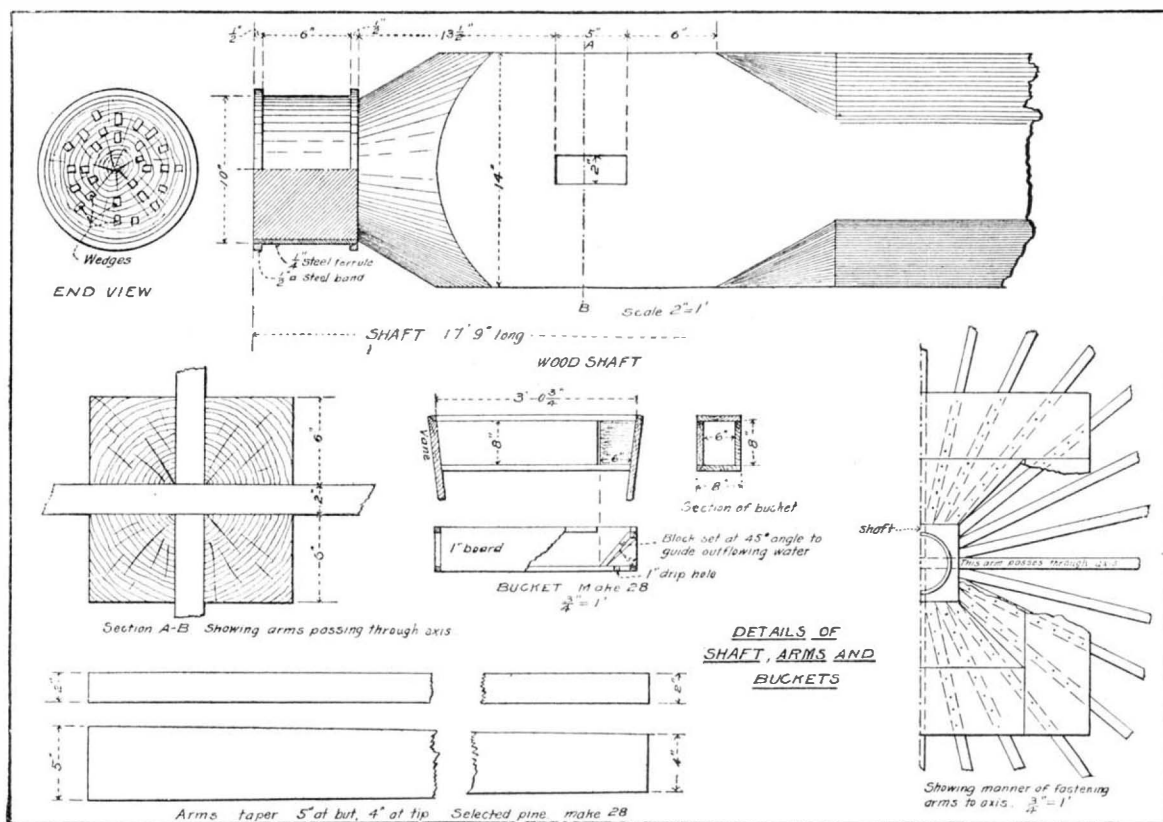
DETAILS OF WHEEL SHOWN IN FIG. 14.
